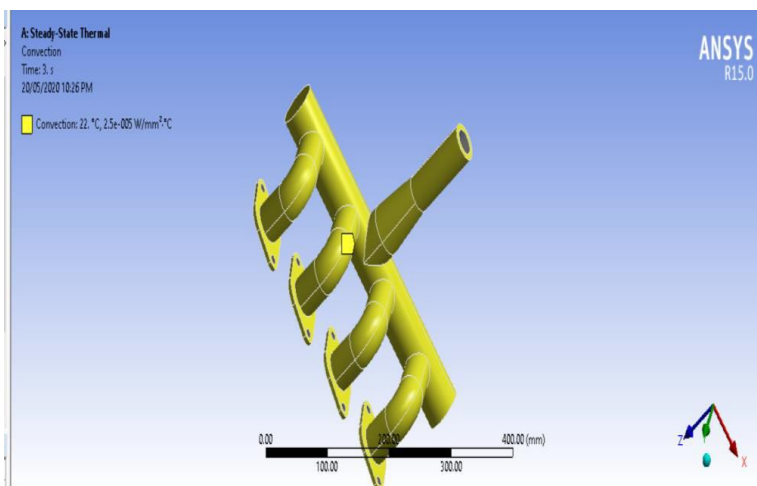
Air convection is applied on the external surface of the exhaust manifold.
